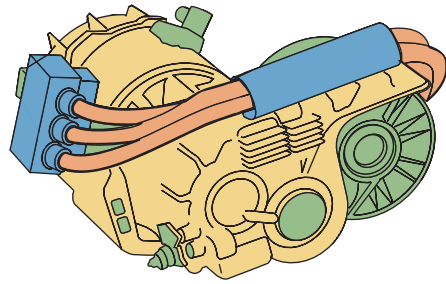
The electric drive motor and transaxle assembly from a Toyota FCHV. Note the three orange cables, indicating that this motor is powered by high-voltage three-phase alternating current.
